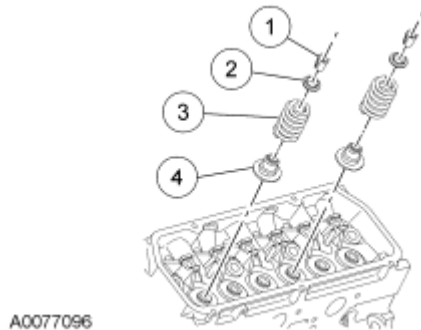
Identifying Spring Retainer Key, Spring Retainer, Spring & Stem Seal
